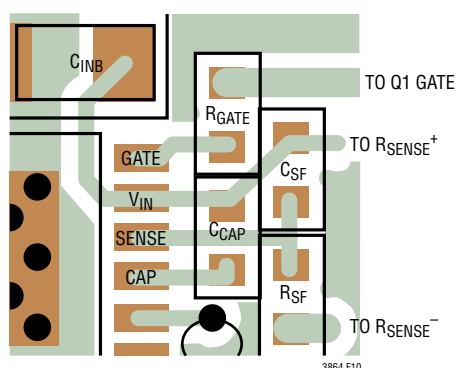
LTC3864 Recommended Gate Driver PC Board Placement, Layout and Routing
